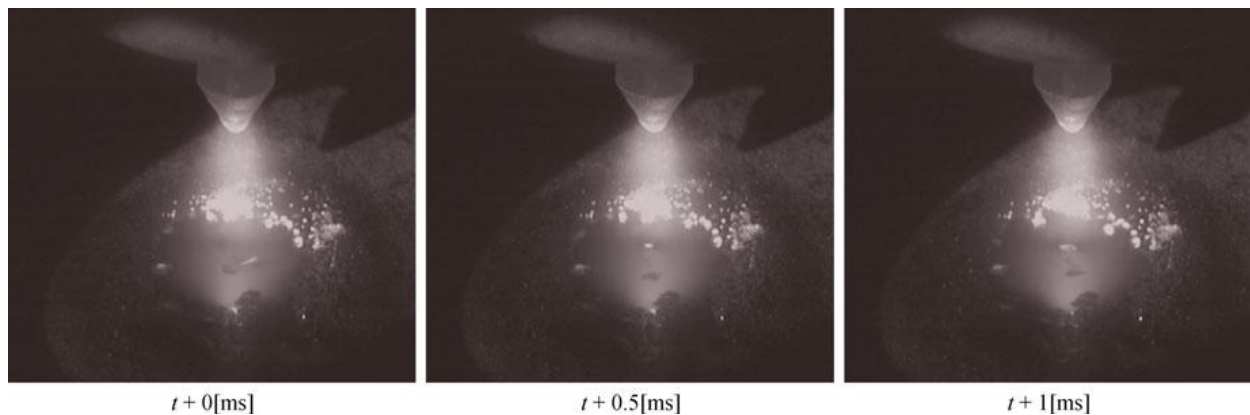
observation of molten pool during ATIG welding (Zhang et al [2010])
